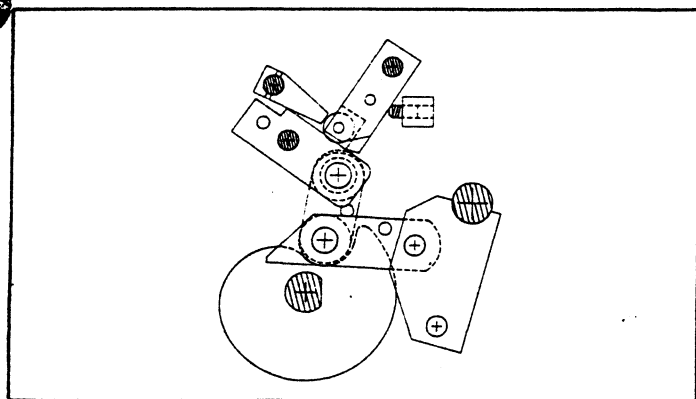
Close Latch Arm Engaging Close Latch Shaft
